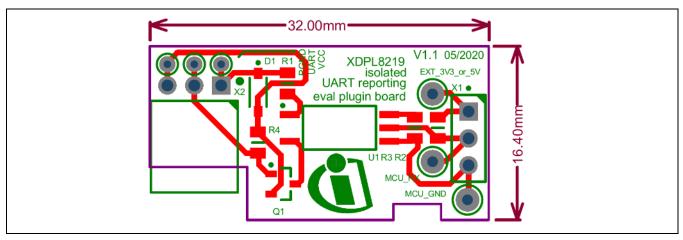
PCB top layout of isolated UART reporting evaluation plug-in board
